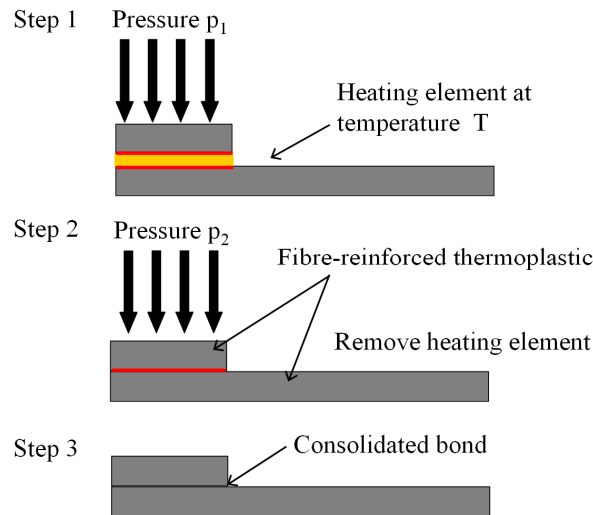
The principle of ‘hot-tool’ welding.
